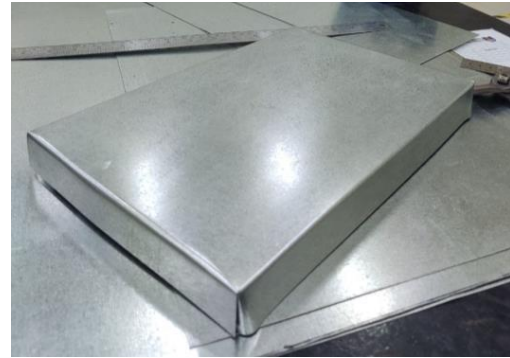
Fabricated base on the machine using 1mm aluminium plate.
